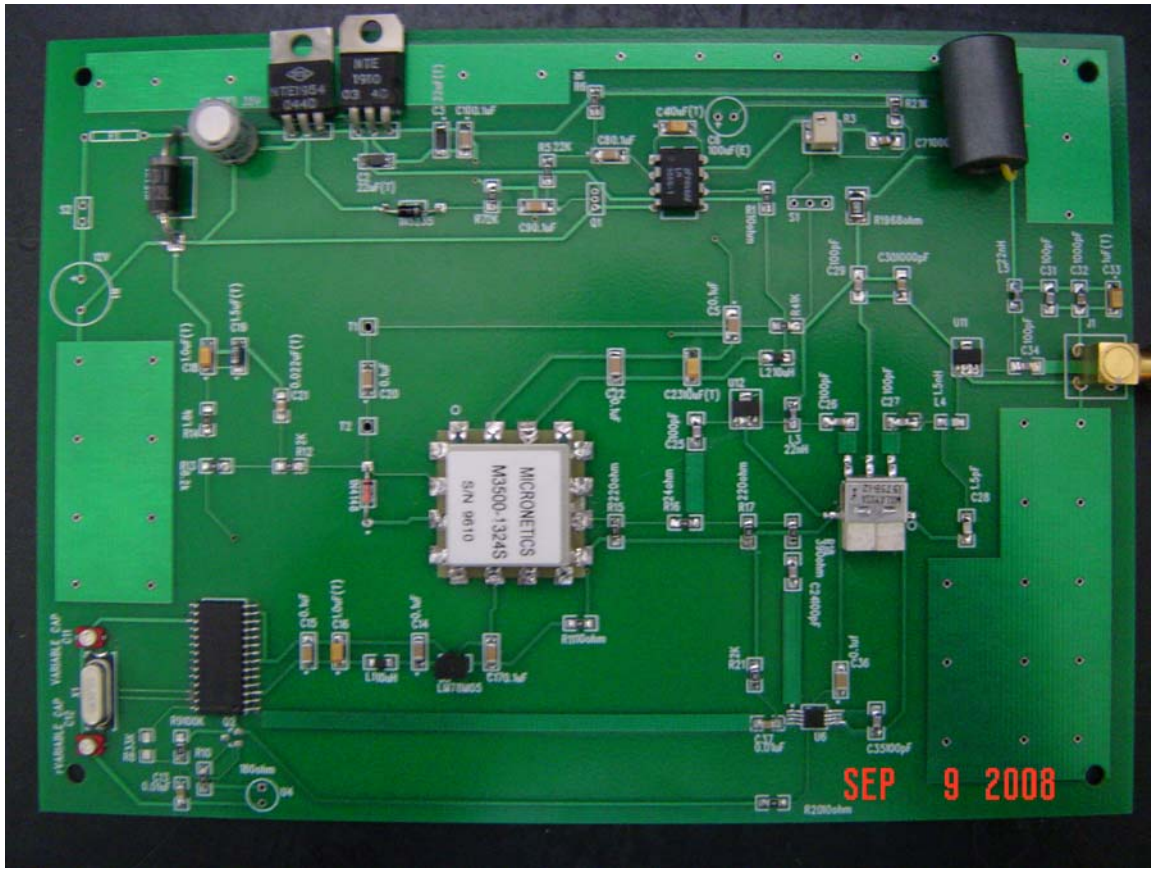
Printed Circuit Board Produced Using PCB Layout[®]
